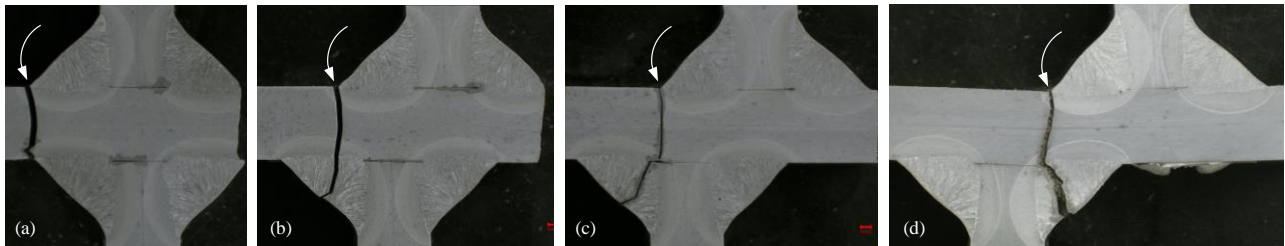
Fatigue failures of the test specimens: (a) a reference specimen (S11_NLCX_1), (b) $e = 6$ mm, (c) $e = 9$ mm, and (d) $e = 16$ mm. White arrows show the weld toe location of an initiated fatigue crack.
